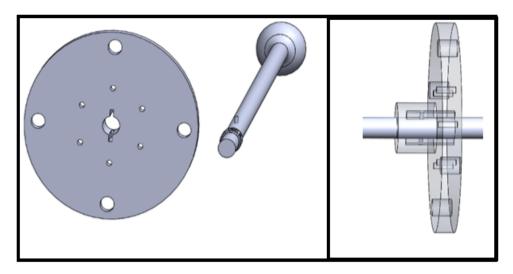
(left) Spear and slot shown separately (right) Prismatic constraint shown with mate, in assembly
